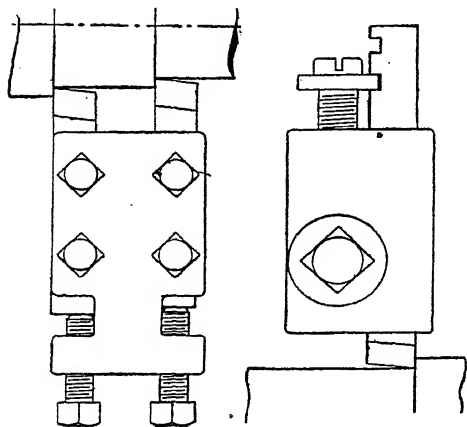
Arrangement of toolholder adjusting screw and coolant supply.
